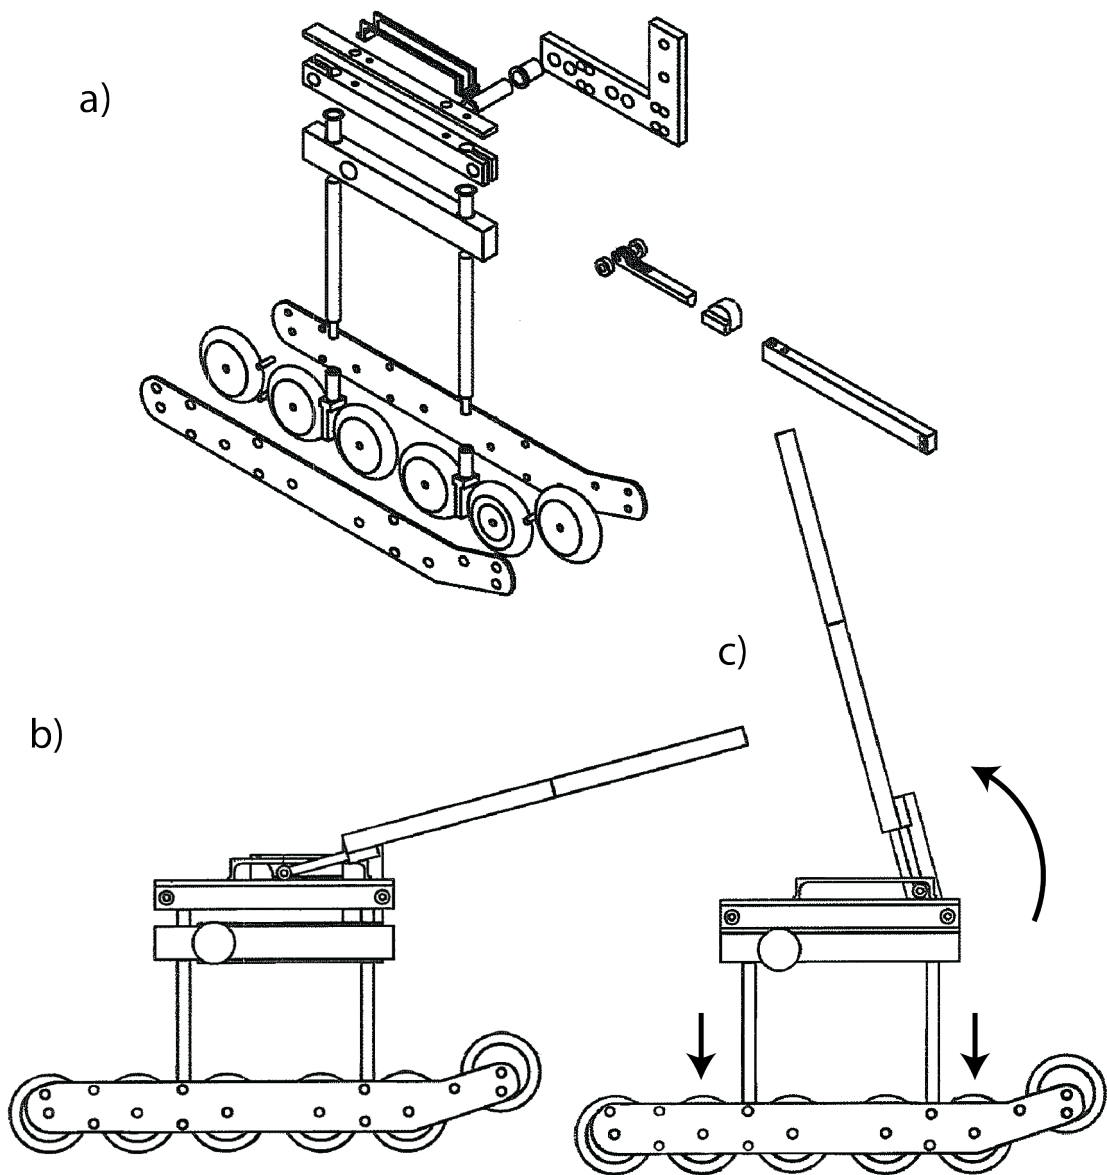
Mechanical drawings of Wheelchair Gap Enabler. a) Exploded view, b) initial position, c) final position
